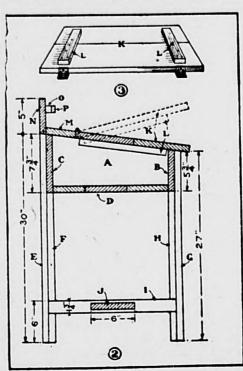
shows the completed desk and Fig. 2 shows a cross-section taken the box beneath the top (Fig. 4). Cut the two ends A by the pattern in Fig. 5, and cut front board B and back
